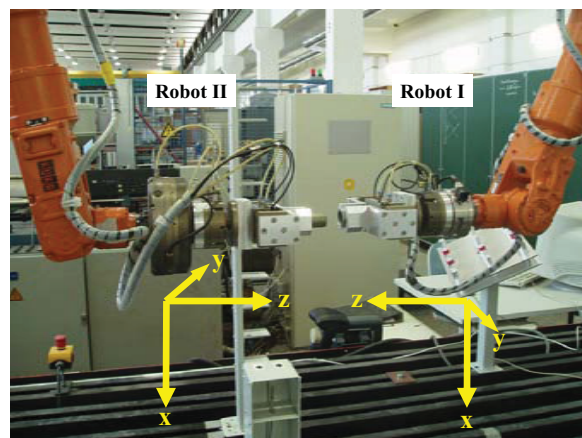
Scenario of screwing and orientation of robot tool frames.
